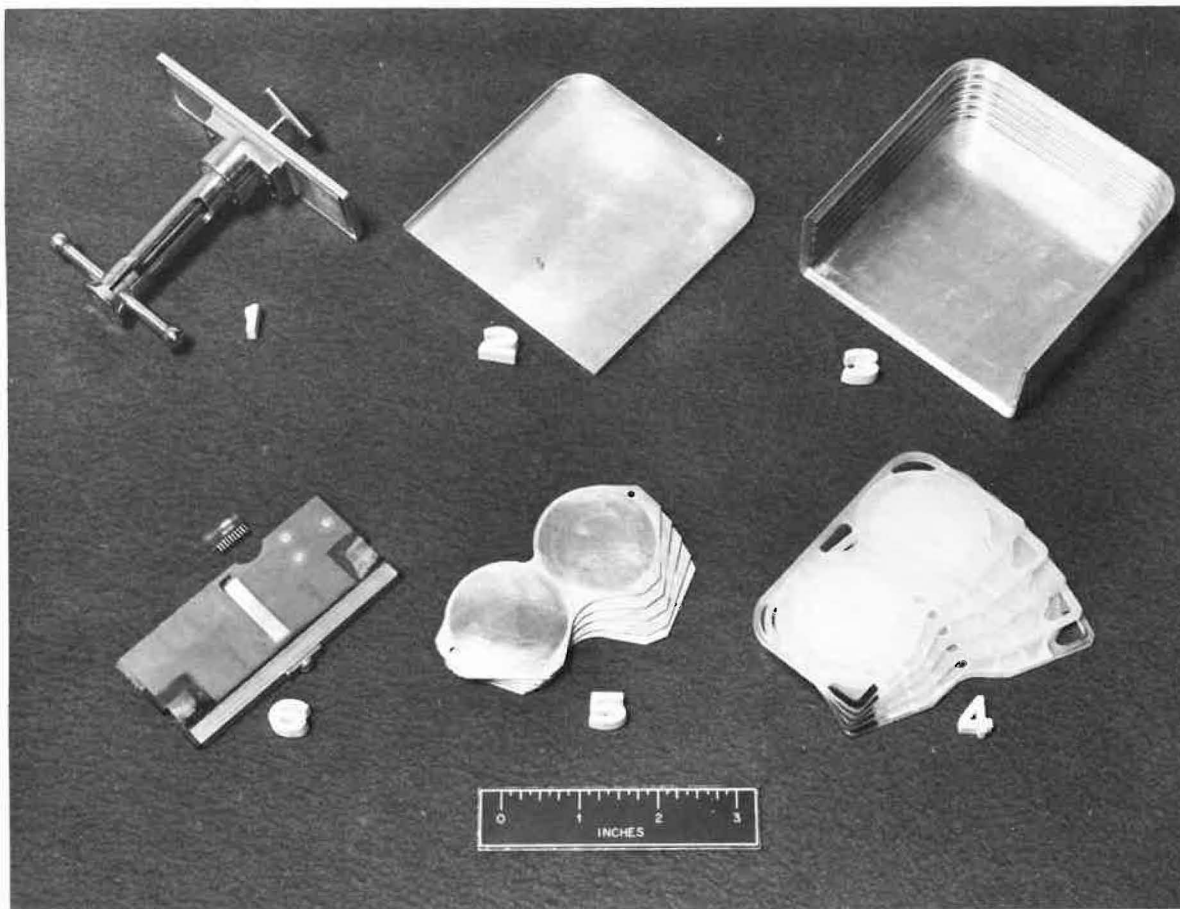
Major components of the S-4 experimental device showing: 1, operating handle and top assembly; 2 and 3, aluminum housing before welding; 4, set of five fiberglass-reinforced blood sample holders; 5, set of five aluminum and platinum ^{32}P β ray source plates; 6, instrument package with shorting plug.
